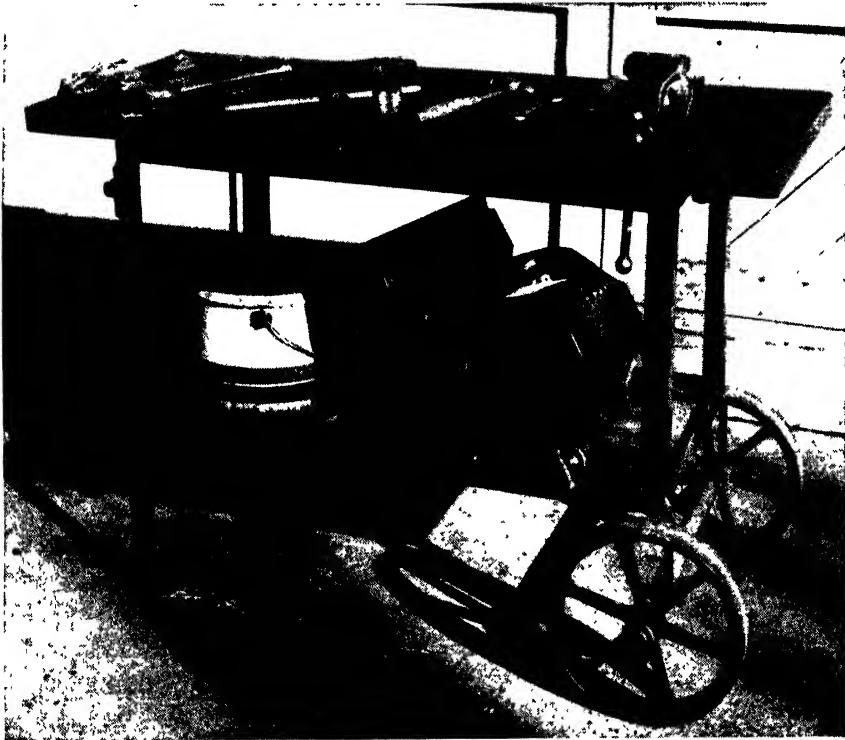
A portable workbench is particularly useful for repairing and adjusting farm machines either in the shop or outside.
